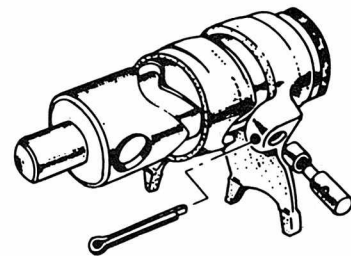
Cotter pins must be installed with round end of head next to round side of shift fork or shifter will bind.
